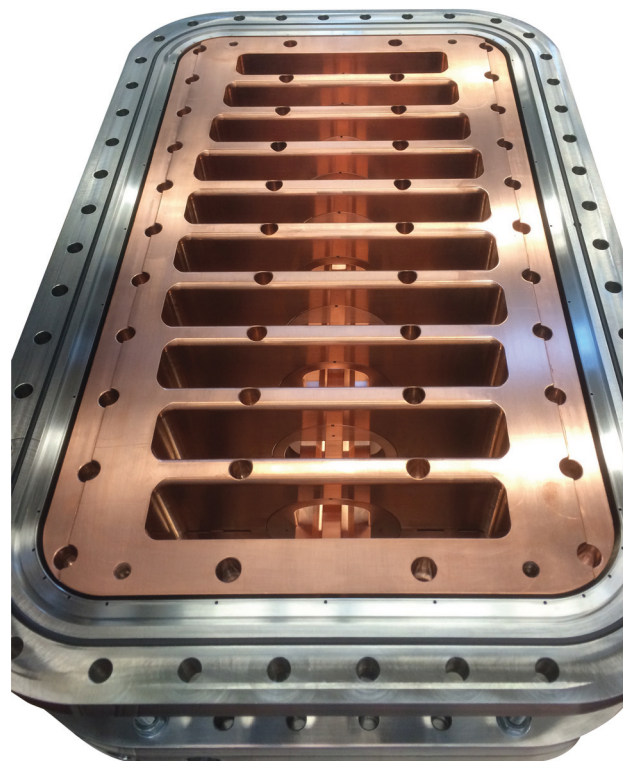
Photography of the Ladder-RFQ as-built. The upper steel-tank was removed for a better view on the inner ring-ladder structure.
